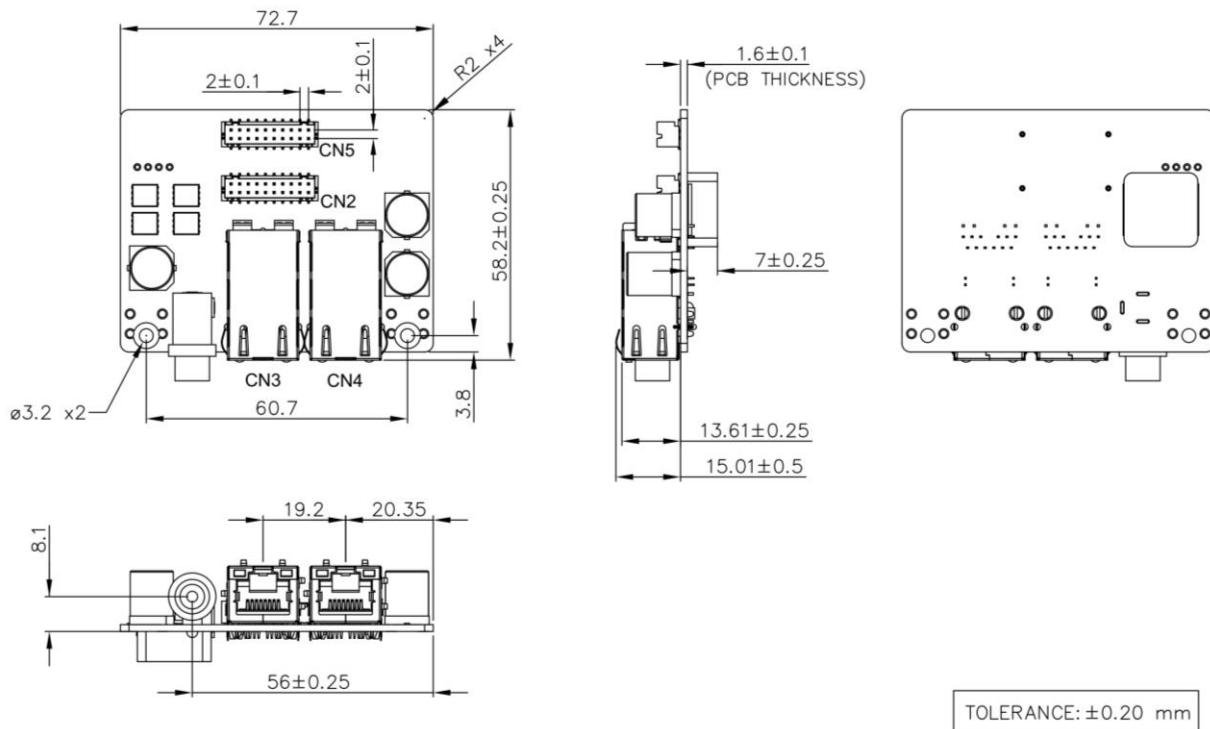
Mounting Hole Daughter Board Drawing - 4Pin Header (EGPL-G2P1-C1/W1)
